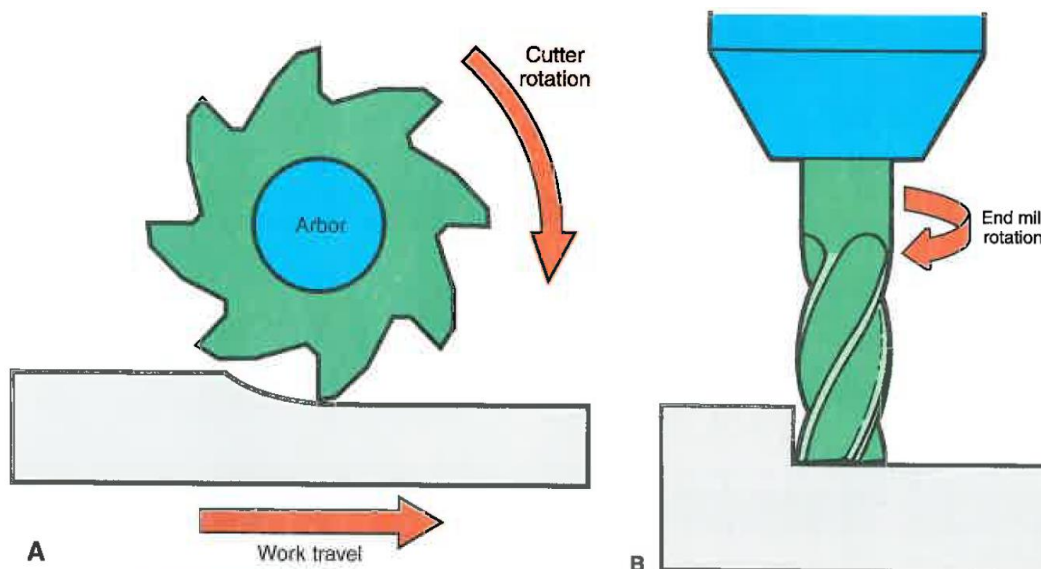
Milling removes material by rotating a multitoothed cutter into the work. A—With peripheral milling, the surface being machined is parallel to periphery of the cutter. B—End mills have cutting edges on the circumference and the end.
